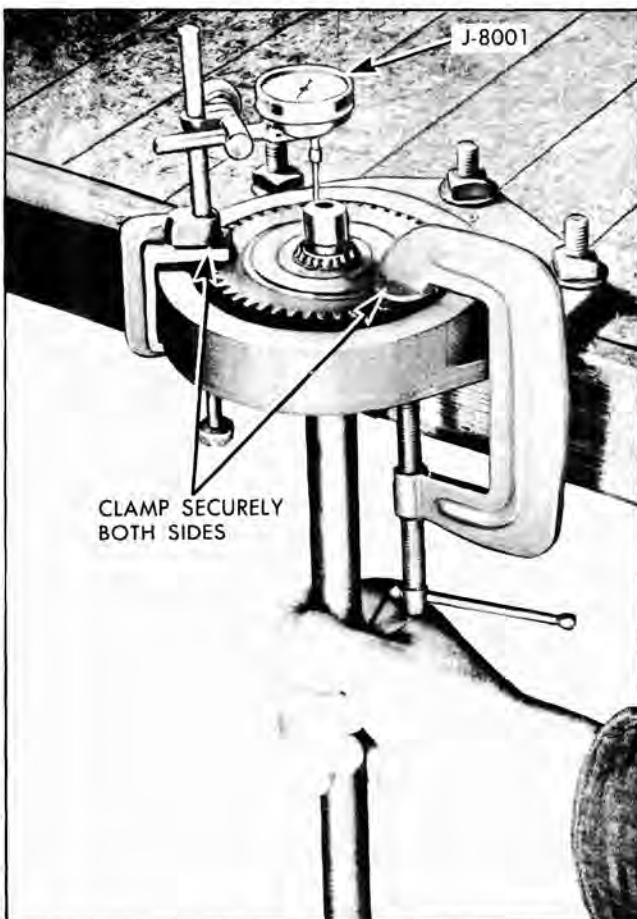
Measuring End Play of Rear Unit Sun Gear on Mainshaft
